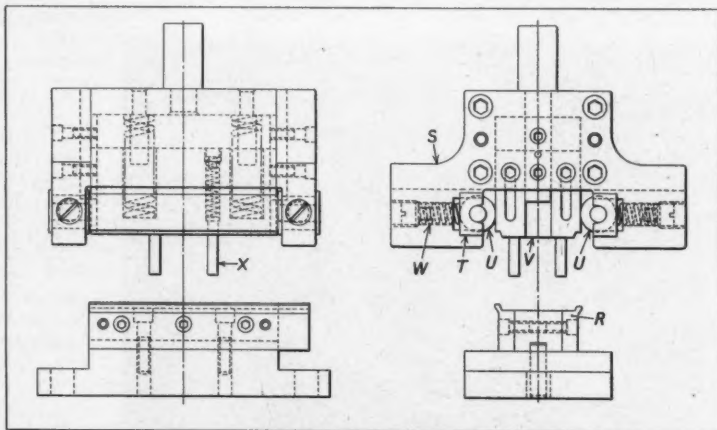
Side and end elevations of the second stage forming tool. The upper tool assembly incorporates two spring-loaded rollers which bend the sides of the workpiece round the lips that extend lengthwise along the anvil block in the lower tool
